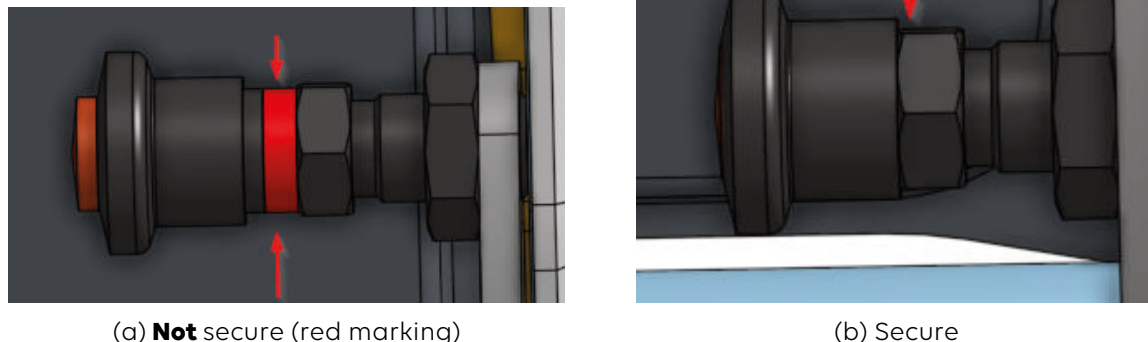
Locking bolts to be unlocked in order to fold the back support
